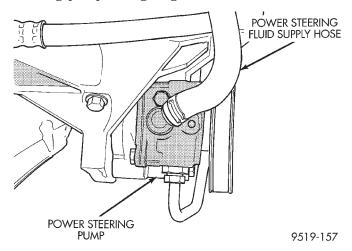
Fluid Supply Hose At Power Steering Pump INSTALLATION
